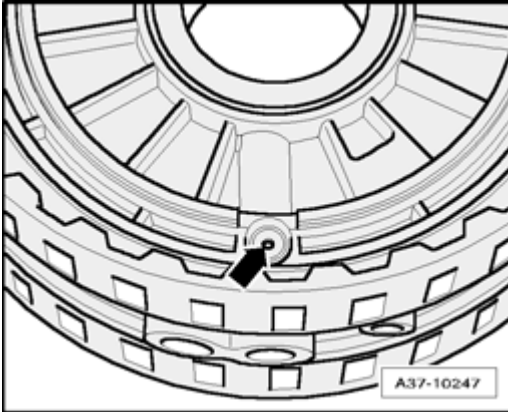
Checking Metal Sleeve For Wear In Cylinder "D/E"
